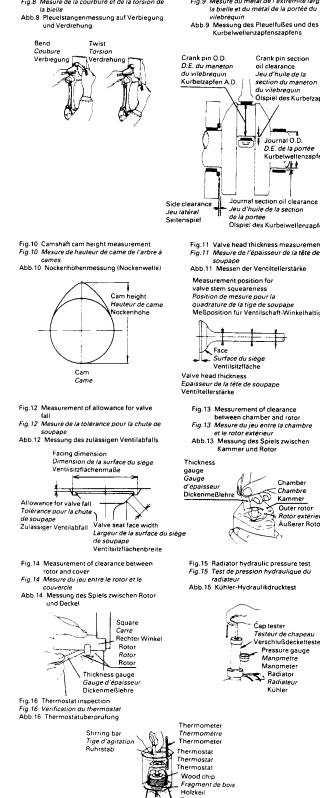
Measurement of connecting rod large and metal and crankshaft journal metal Fig.9 Mesure du métal de l'extrémité large de la bielle et du métal de la portée du
